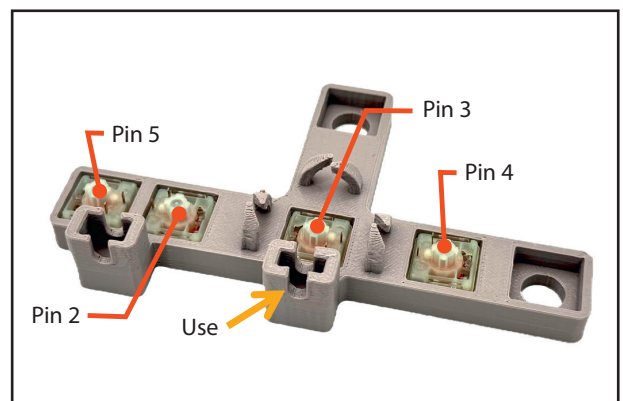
Setup in Key-Soldering-Jig for 4 keys.
